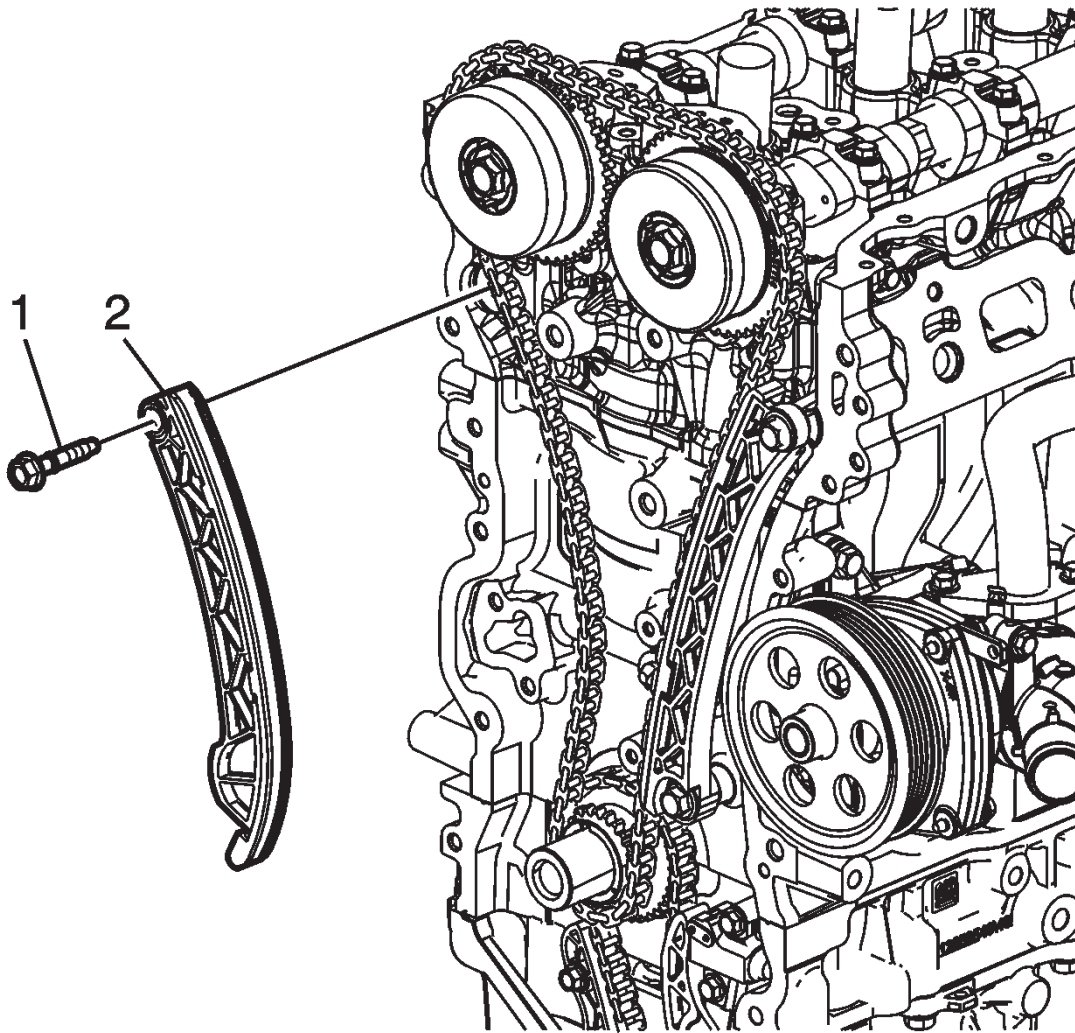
Timing Chain Tensioner Pivot Arm Bolt
